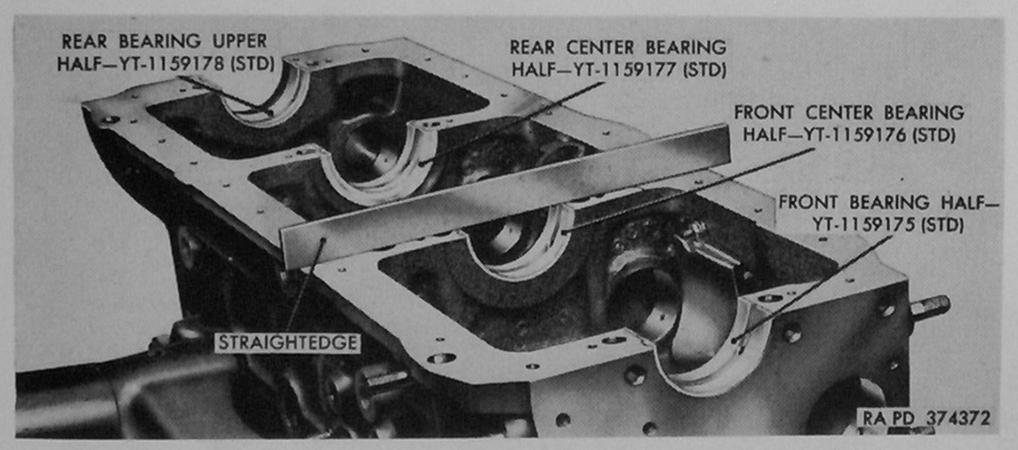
Checking for correct position of crankshaft bearing halves with straightedge.
